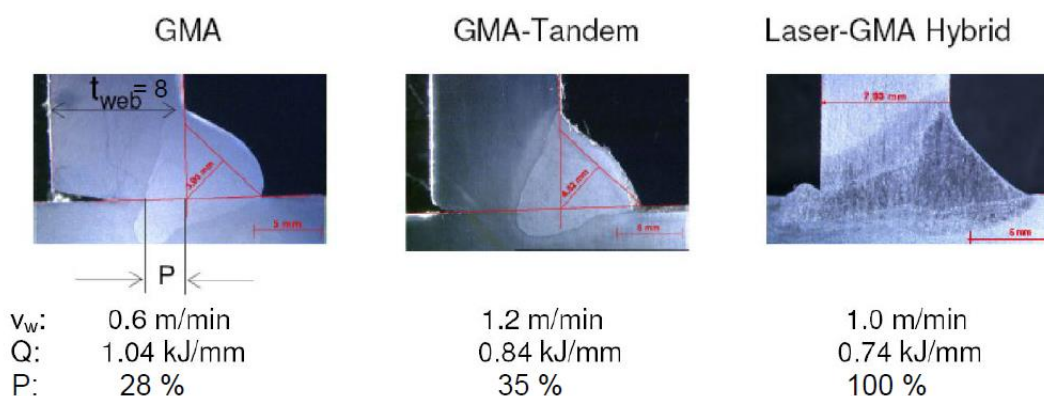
Welding of a T-profile with three different welding methods. A T-profile using, GMAW with 28% weld penetration (left), GMA-Tandem with 35% penetration (middle), HLAW with 100% weld penetration right) (Egerland, et al., 2013)
